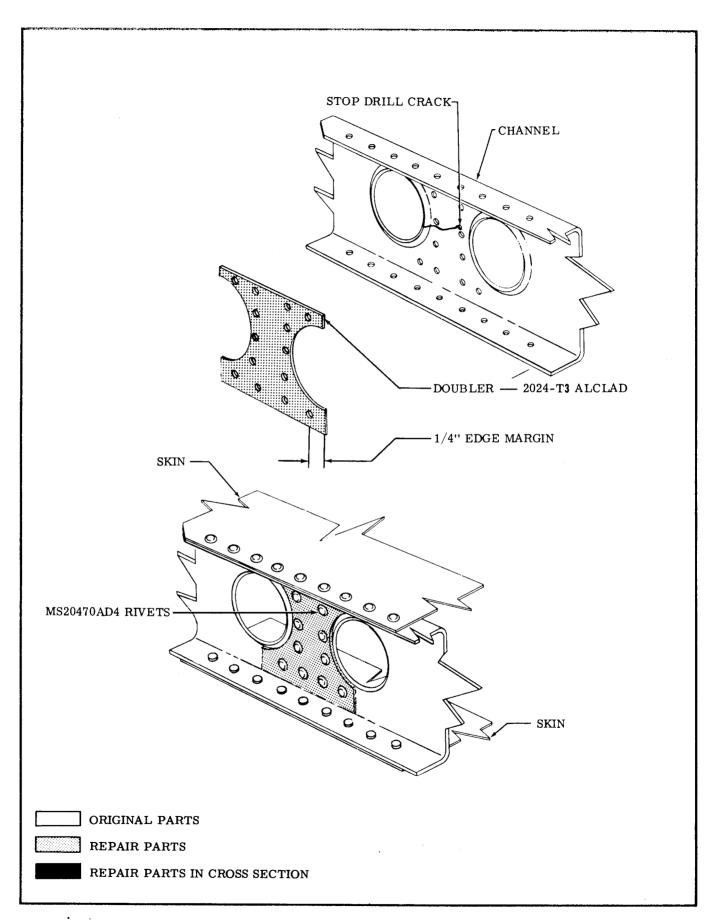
Stringer and Channel Repair (Sheet 3 of 4)
